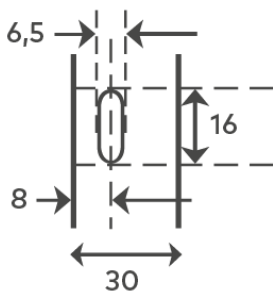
Drawing long hole LEO series (40 mm frame height)
